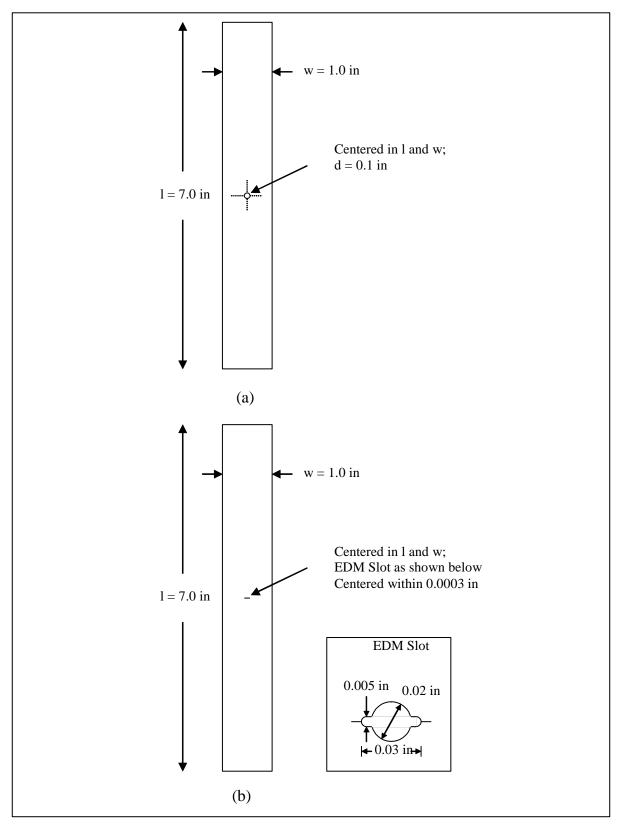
Schematic and dimensions for (a) the center specimens and (b) the center crack-initiated specimens.
